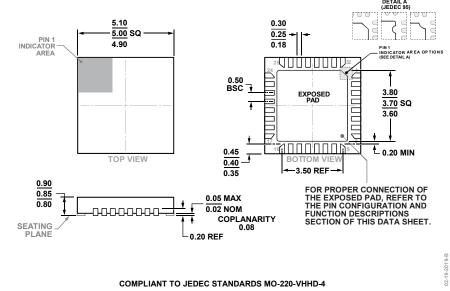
32-Lead Lead Frame Chip Scale Package [LFCSP] 5 mm × 5 mm and 0.85 mm Package Height (HCP-32-1) Dimensions shown in millimeters
